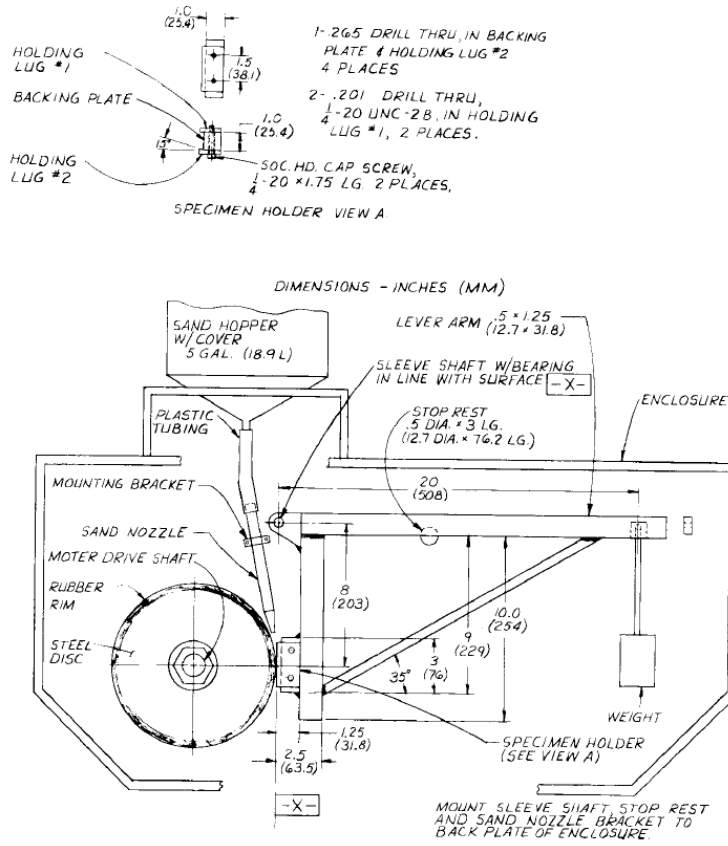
Dry Sand/Rubber Wheel Abrasion Test Apparatus
